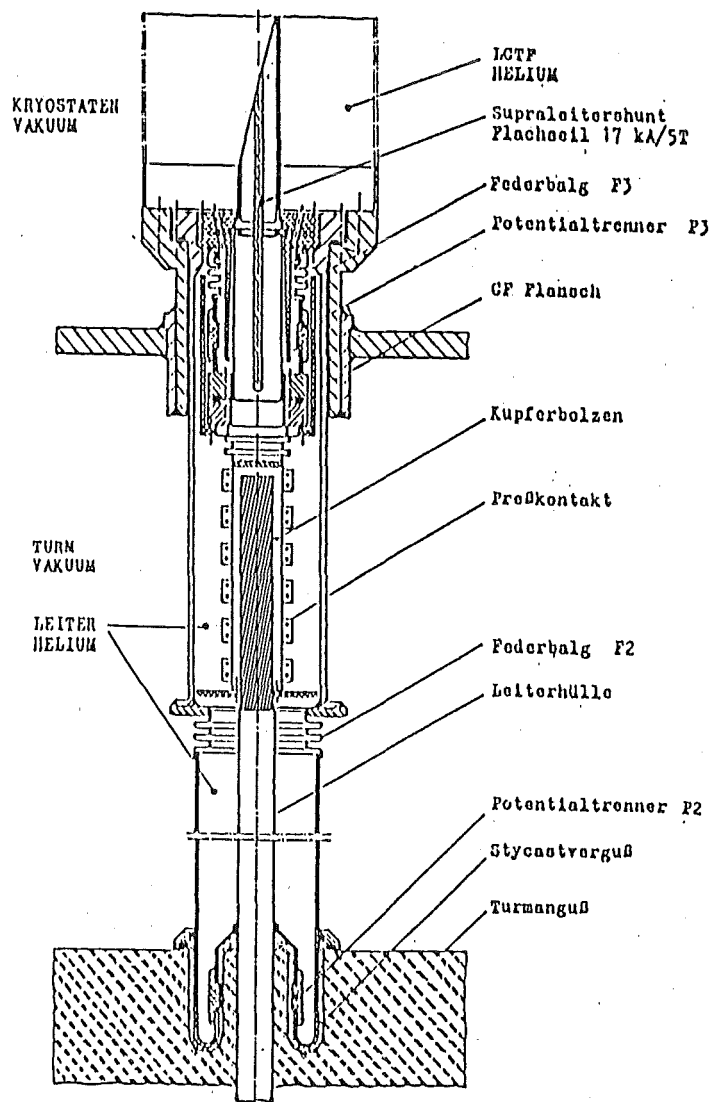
Longitudinal cross section of the coil terminal: The drawing is given in [6]
